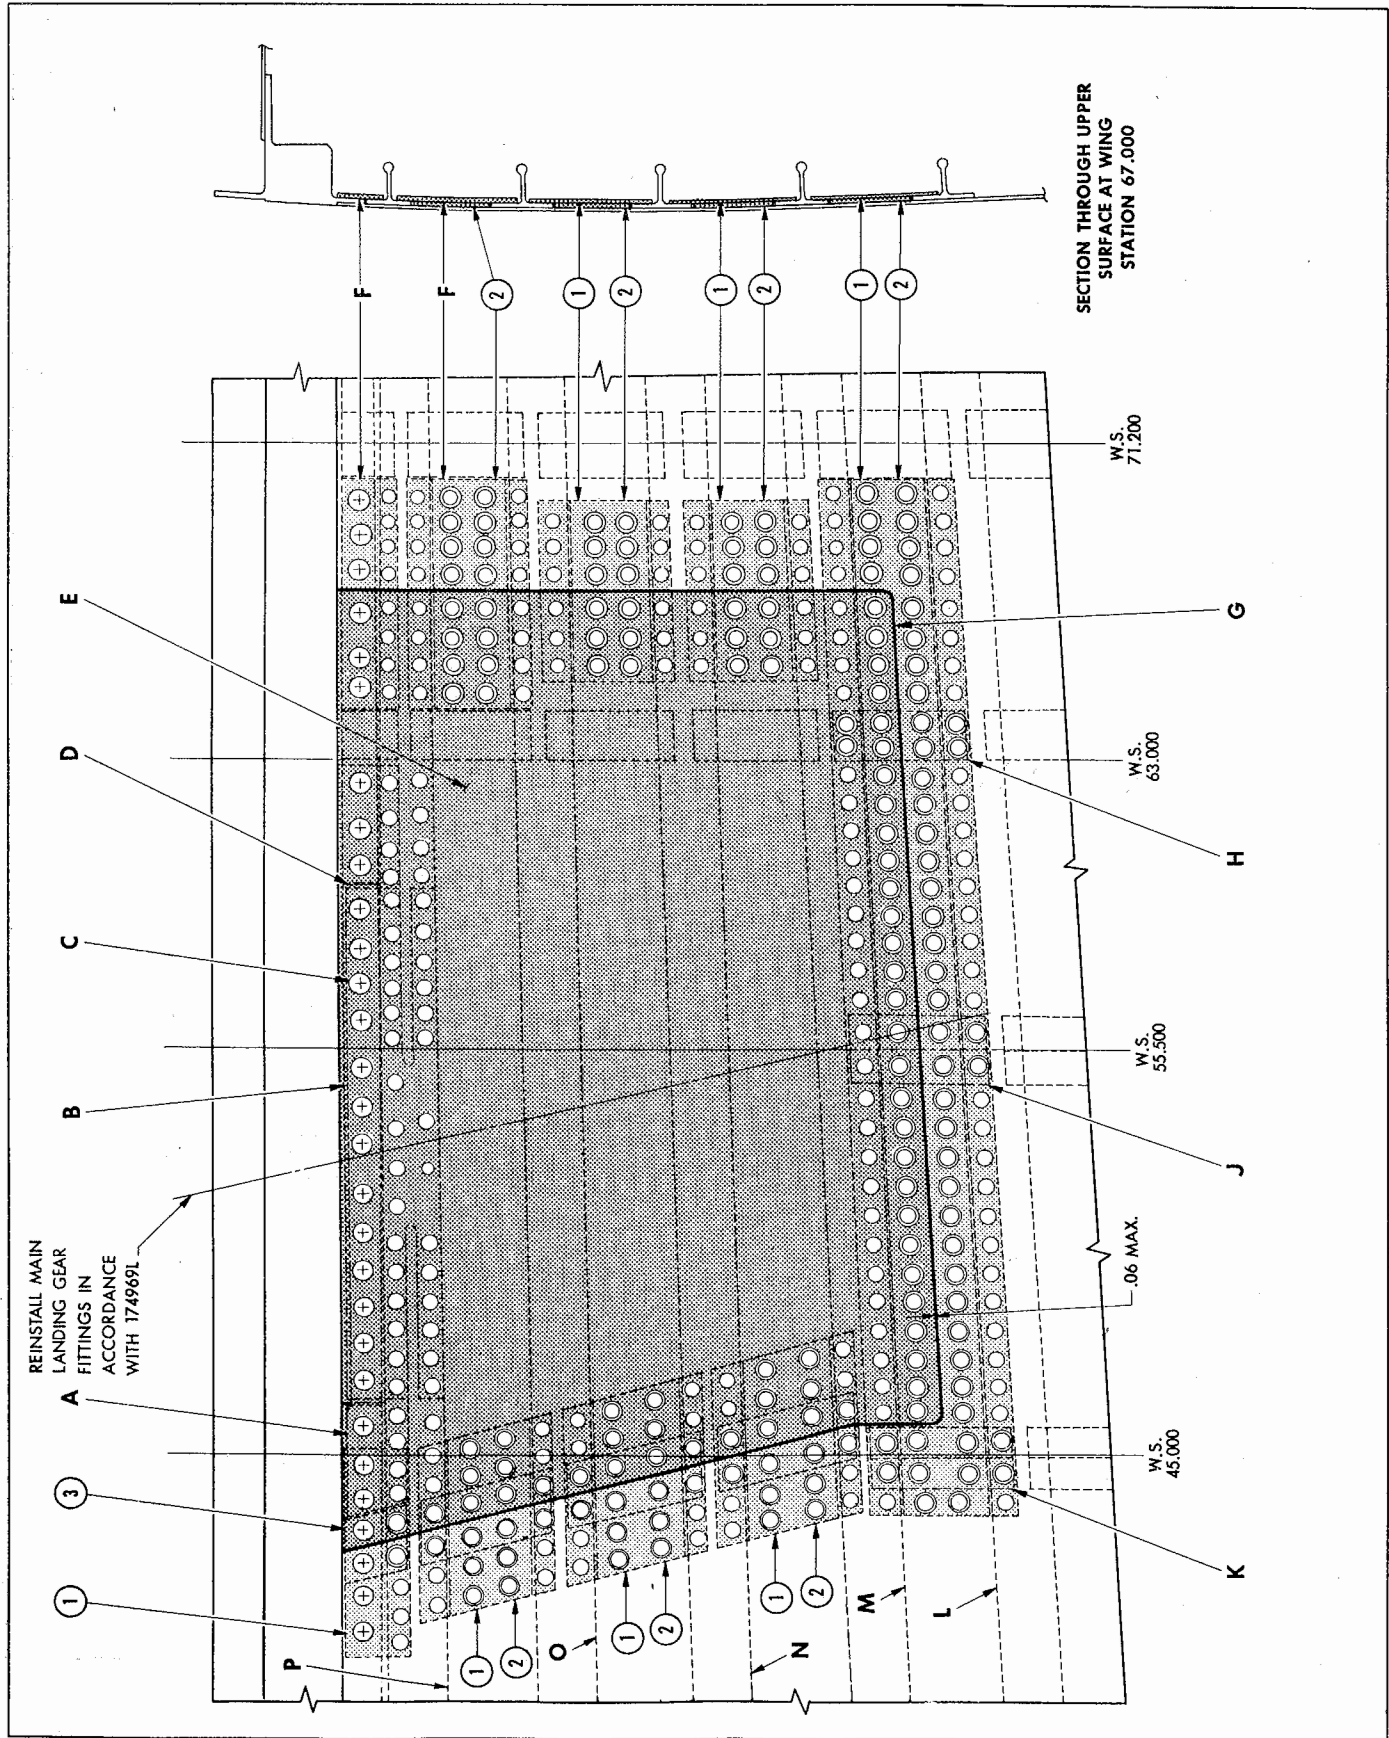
B (Sheet 1 of 3 Sheets) — Repair of Wing Upper Surface and Rear Beam Skin Attachment Flange
